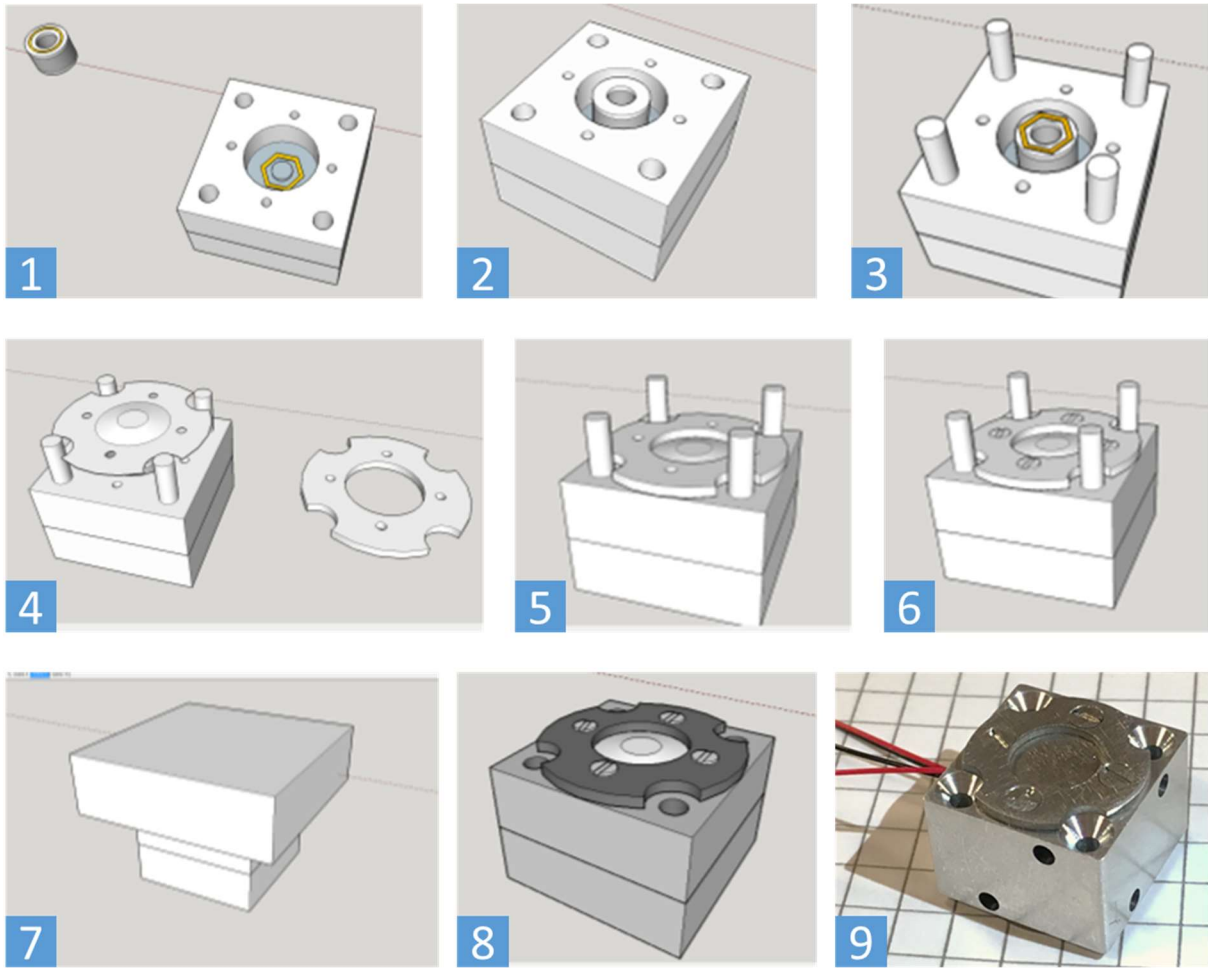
3D models of the different steps of the assembly of the high bandwidth Z-actuator. 1) Glue is deposited on the cylindrical piezoelectric piece (left) and at the bottom of the aluminum body (right). 2) Both are assembled. 3) Glue is deposited on top of the piezoelectric actuator, poles are screwed on the side for future flexure guidance. 4) Flexure is assembled. 5) Flange is assembled. 6) Flange is screwed. 7) Glue reticulation is done with an applied pressure. 8) Final Z-actuator. 9) Real Z-actuator with the electrical connections to piezoelectric piece. The final block dimensions are 2 cm x 2 cm x 1 cm.
